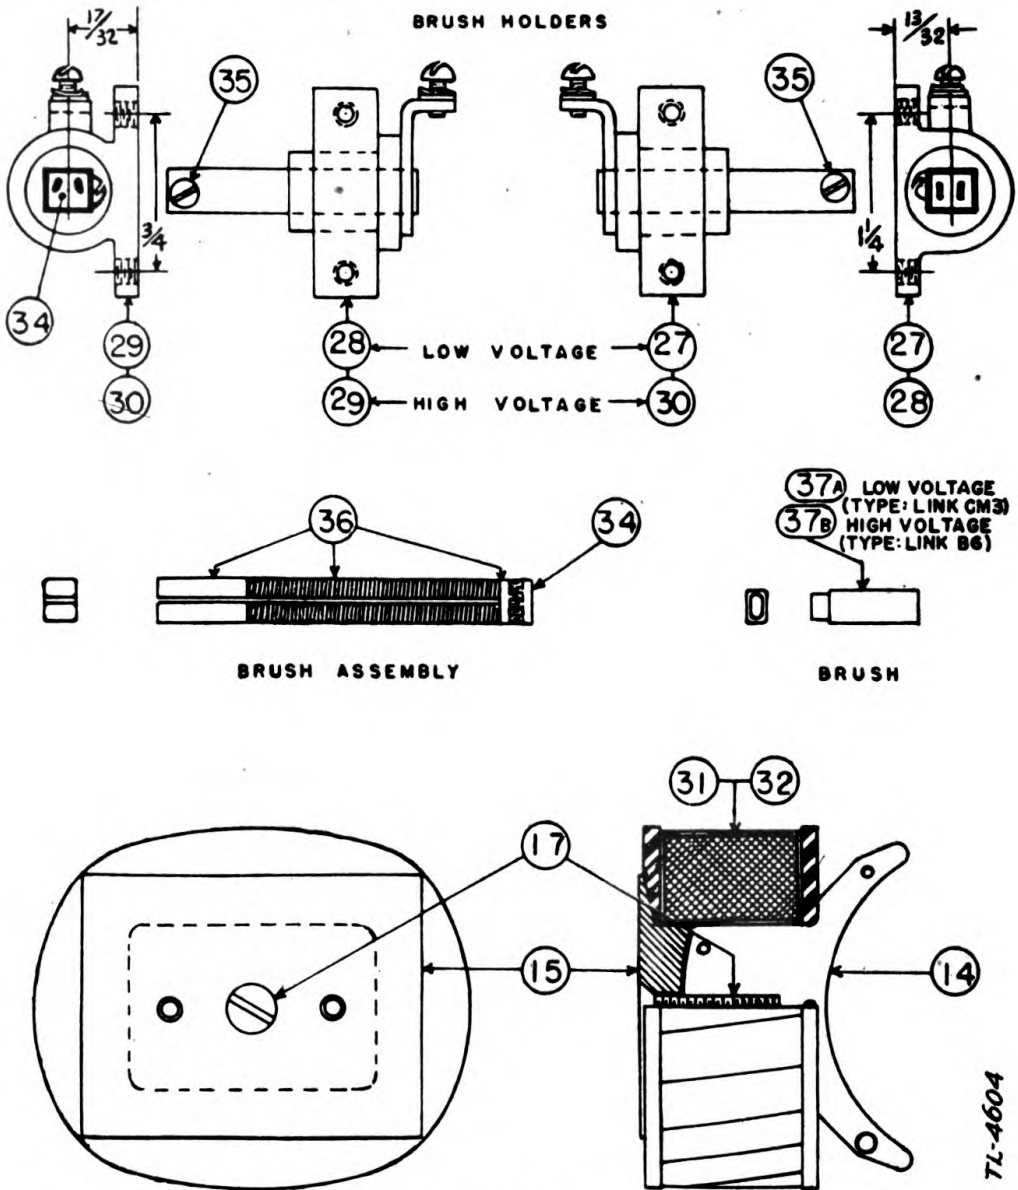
Generator GN-44-A, field coil and brush assemblies.
